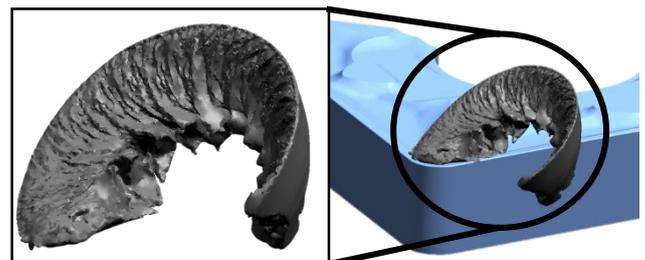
Chip CAD model (obtained from CT) positioned in the cutting tool rake face.
